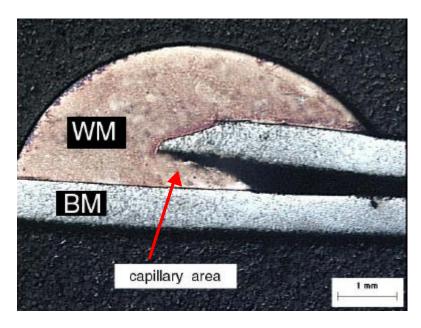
Detail of fillet welded joint obtained by MIG-Brazing welding process showed a high base metal dilution of the weld through capillary. Weld metal (WM) and base metal (BM).
